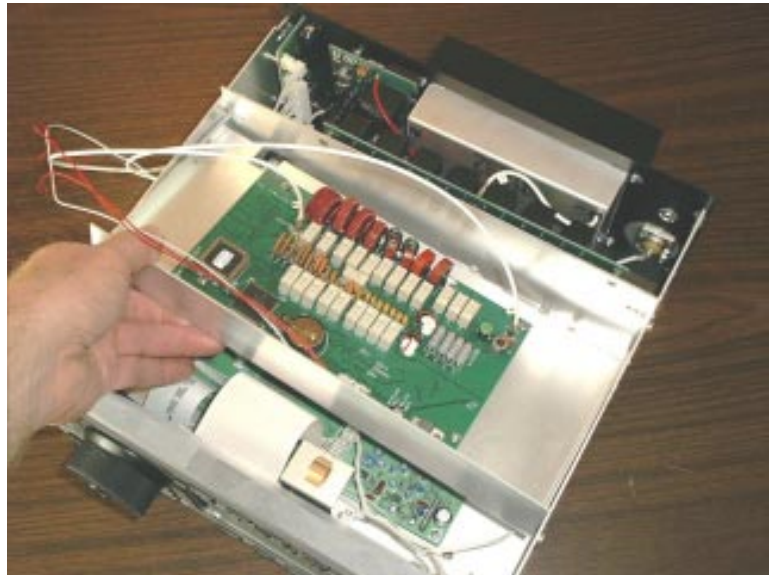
Placement of tuner in chassis above Logic/DSP board
